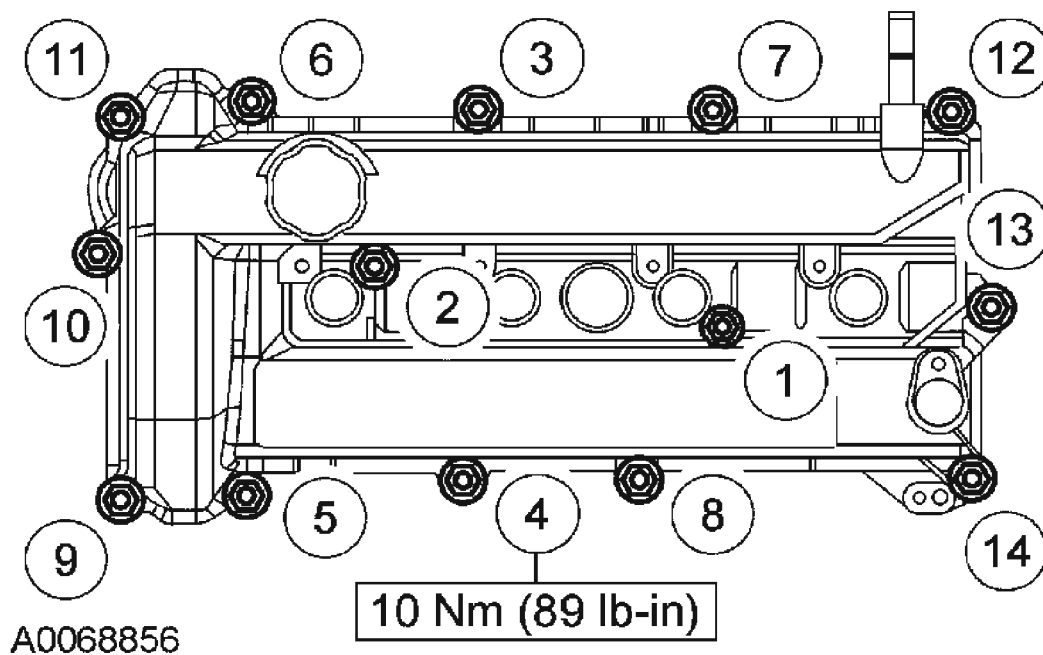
Identifying Tightening Sequence Of Valve Cover Bolts
